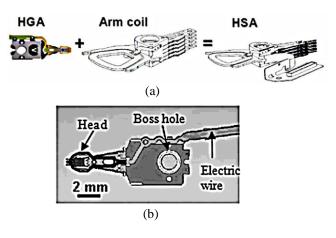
Assembly of HGA with an arm coil; (a) assembly process of Head Stack Assembly (HSA), (b) magnified image of HGA and its components.
